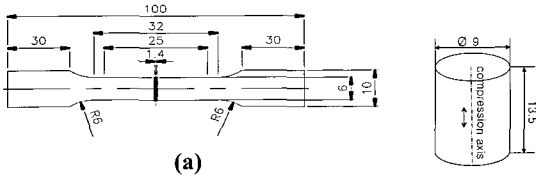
(a) ASTM E80 subsize specimen for tensile test, (b) Specimen for compression test
